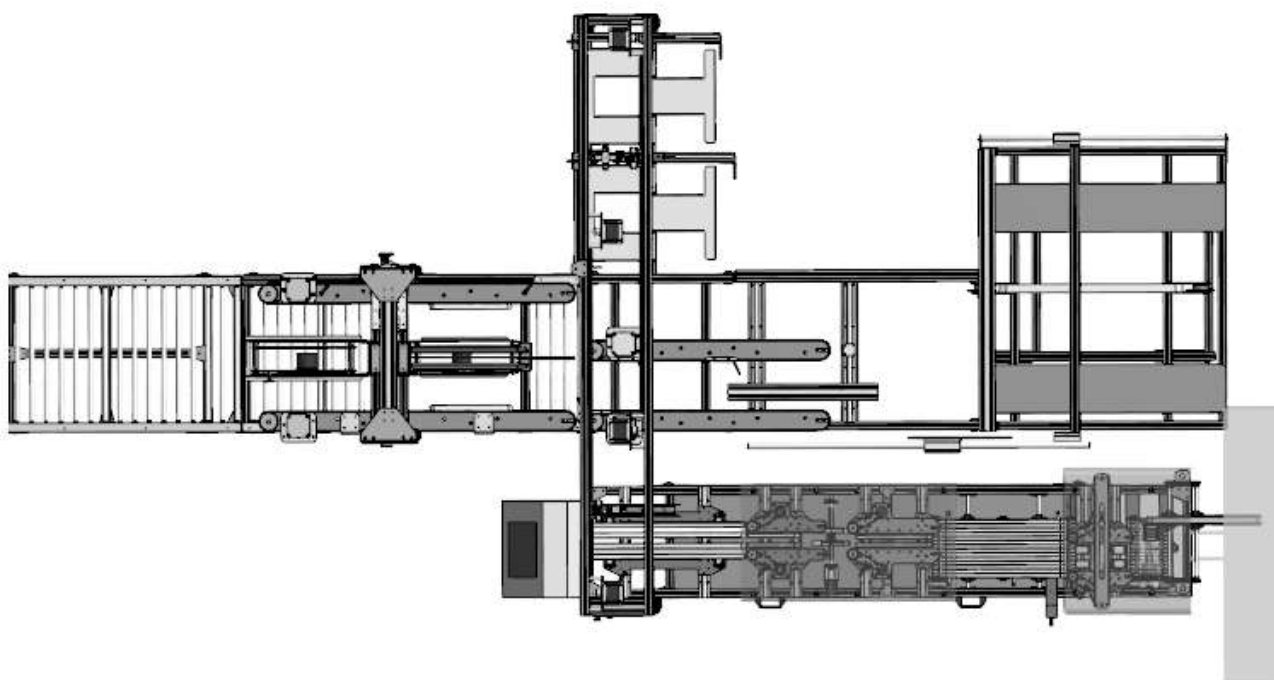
Conveyor line using stepper motors without feedback, view from the top
